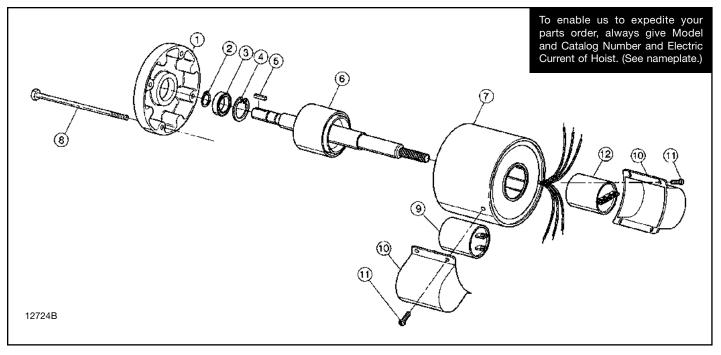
SINGLE PHASE MOTOR ASSEMBLY
